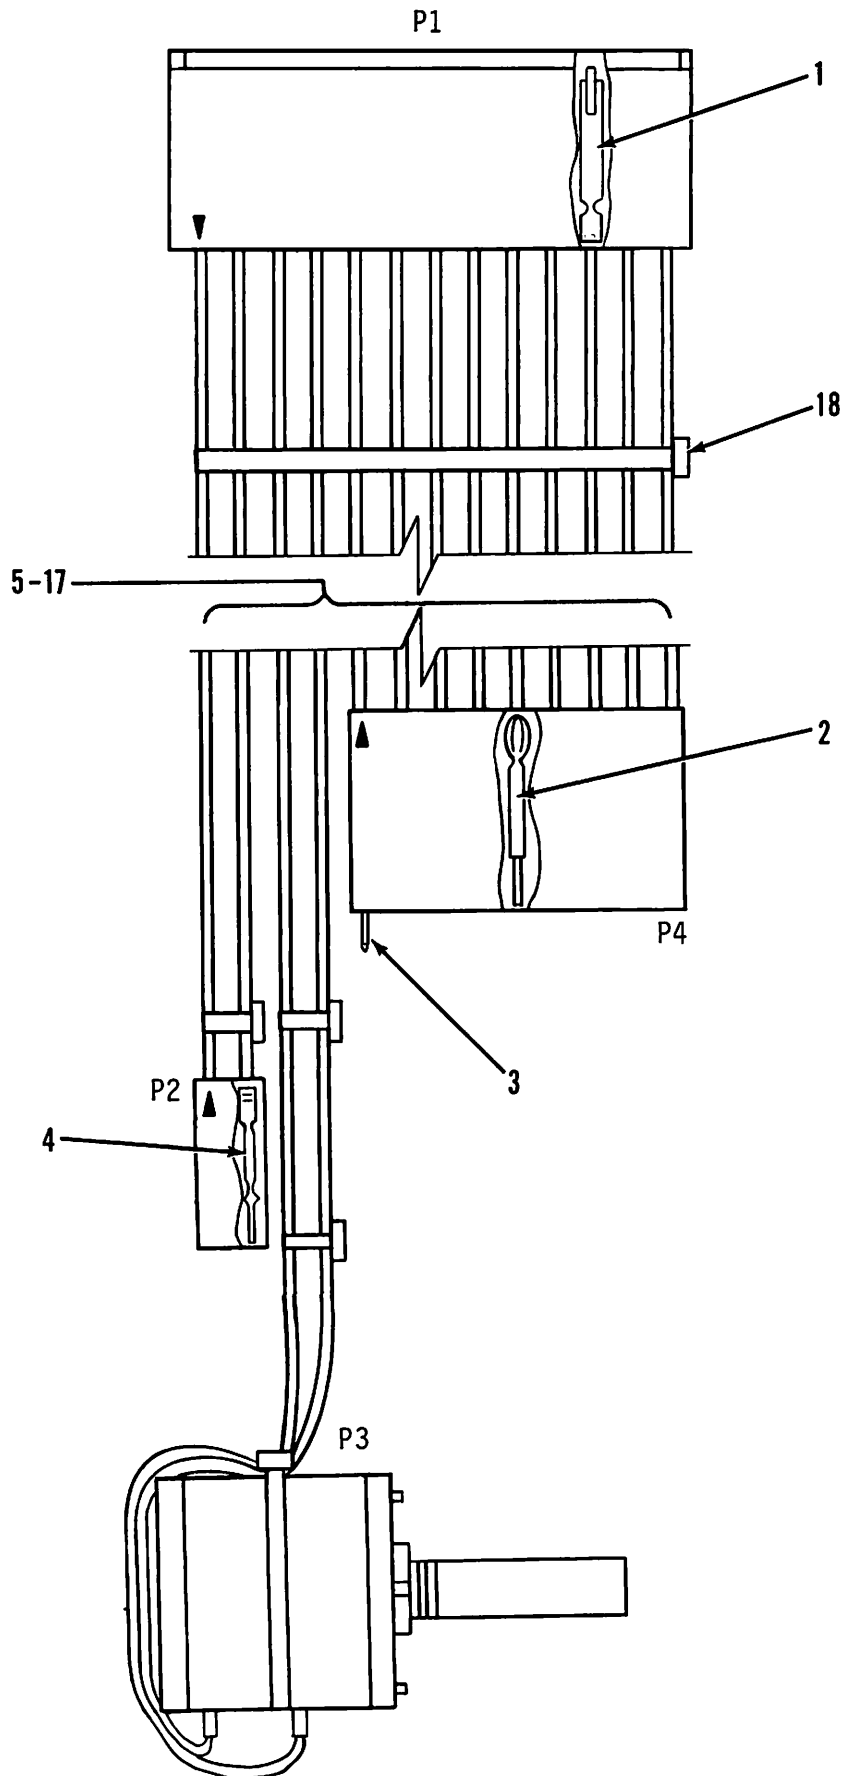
DISPLAY PCB ASSEMBLY
